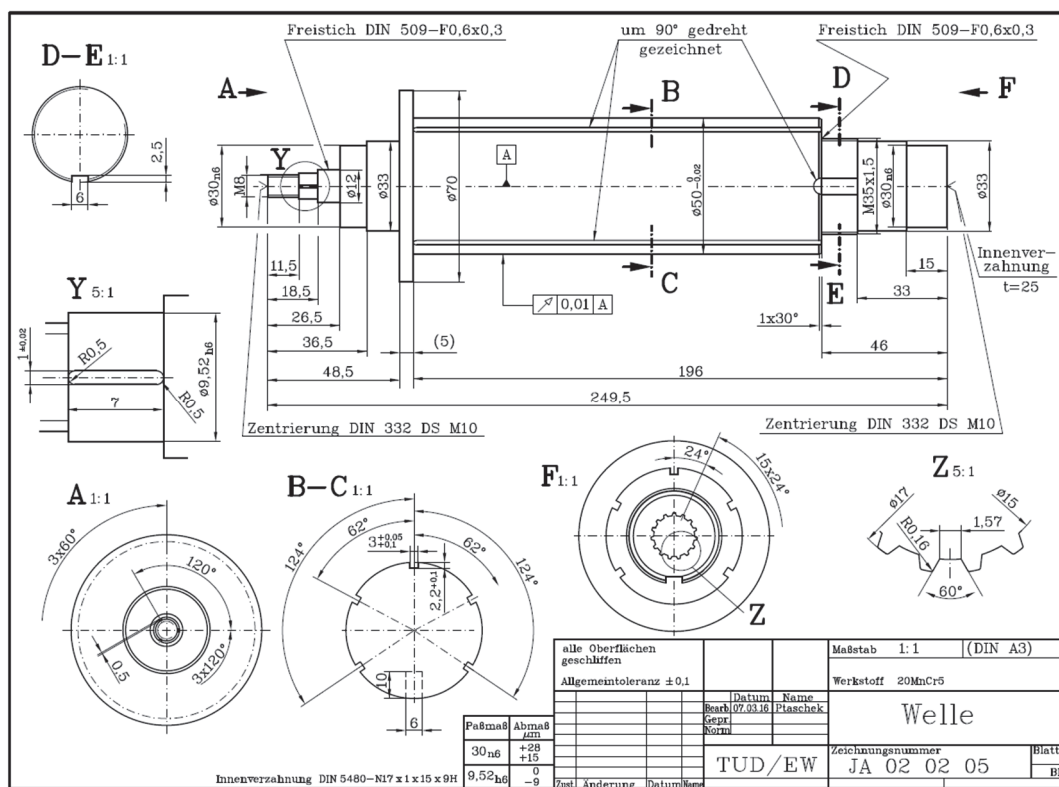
Drawing of rotor shaft of the electric machine for the DE-REX powertrain (EM1, EM2, EM3, EM4)
